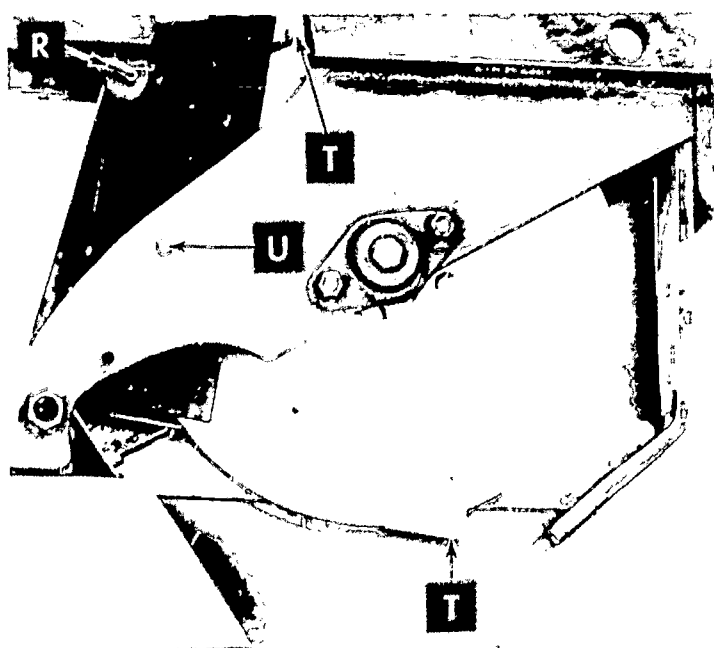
In this illustration, the rotary-valve case has been removed and replaced with a drill case, secured by pin R. The rotor is turned so the lugs T are in the position shown and a pin is inserted at U to lock the rotor.
